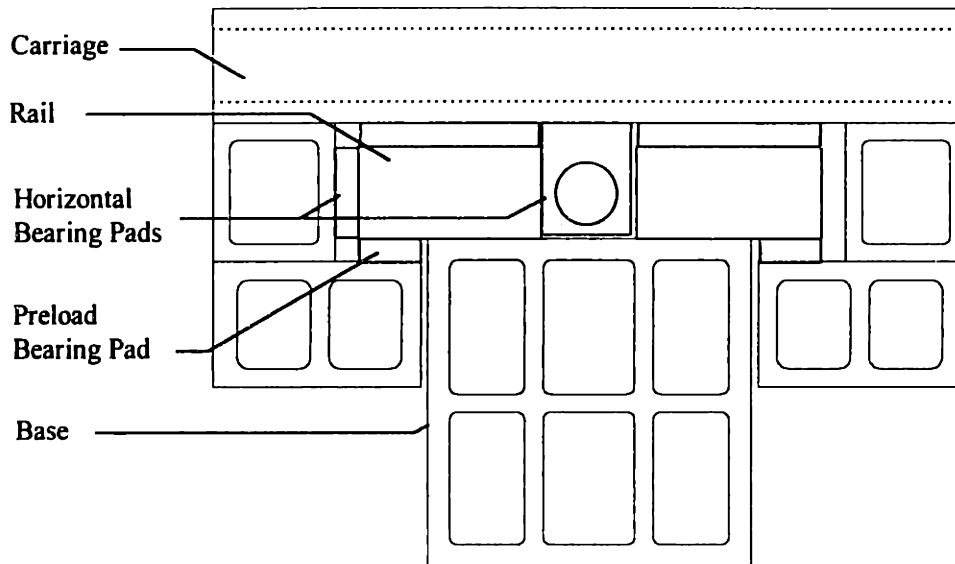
Diagram of the prototype machine tool axis. The gray areas indicate the location of bearing pads. All components were constructed of alumina (96% alumina).
